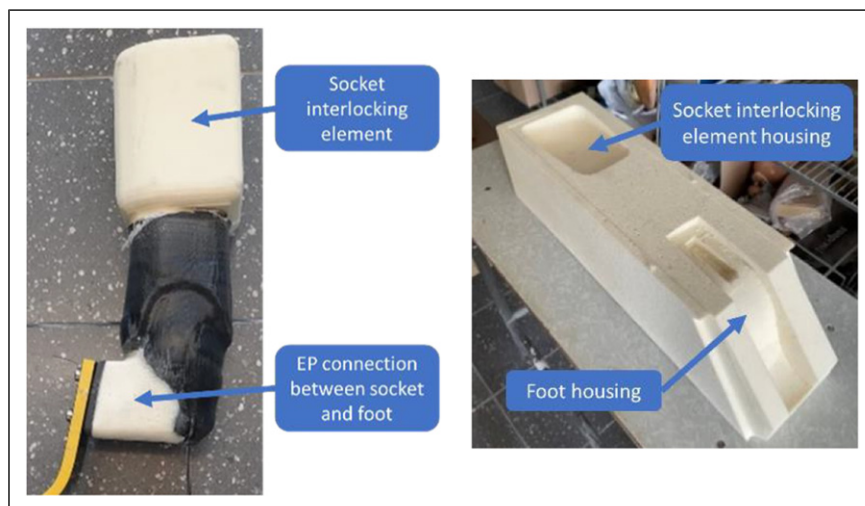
Socket interlocking element (on the left) and alignment box (on the right) obtained with a milling machine.
